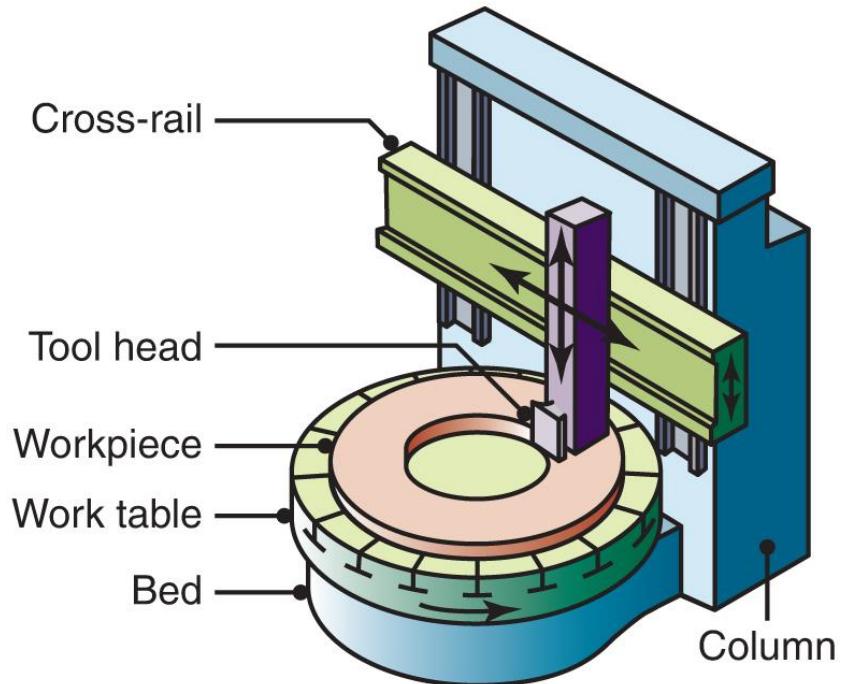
Schematic illustration of a vertical boring mill. Such a machine can accommodate workpiece sizes as large as 2.5 m (98 in.) in diameter.
